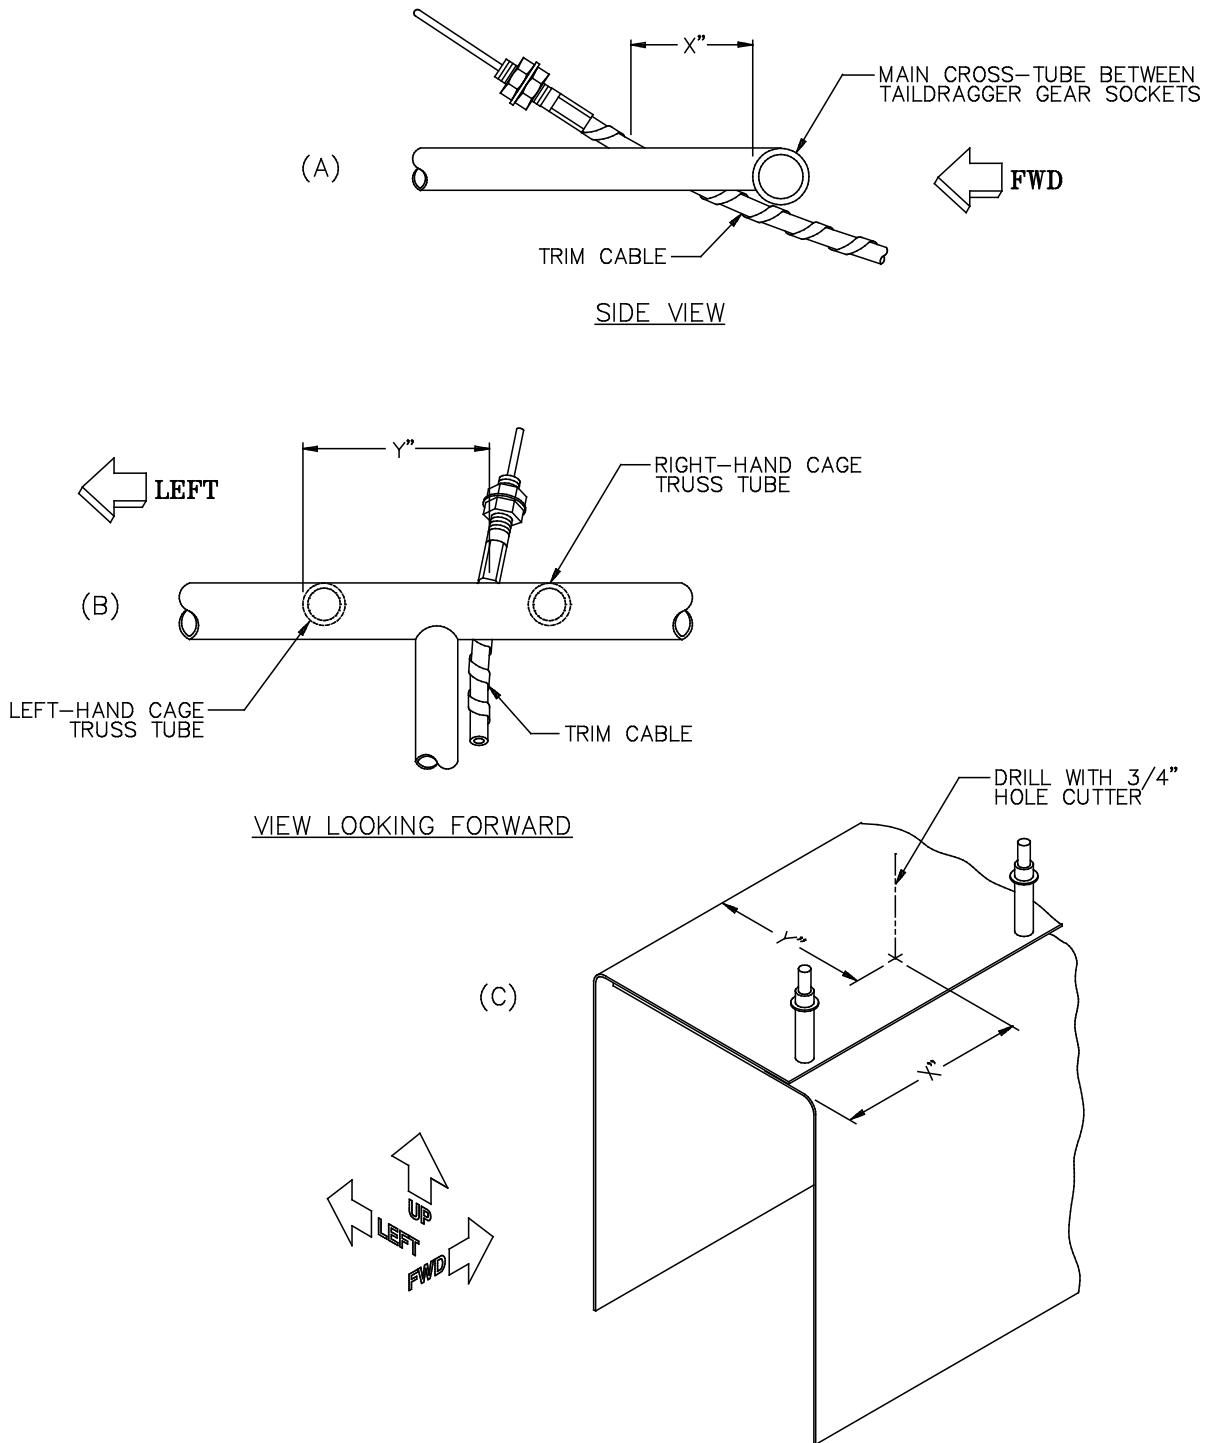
Marking and Cutting the Trim Cable Hole (Manual Trim Only)
